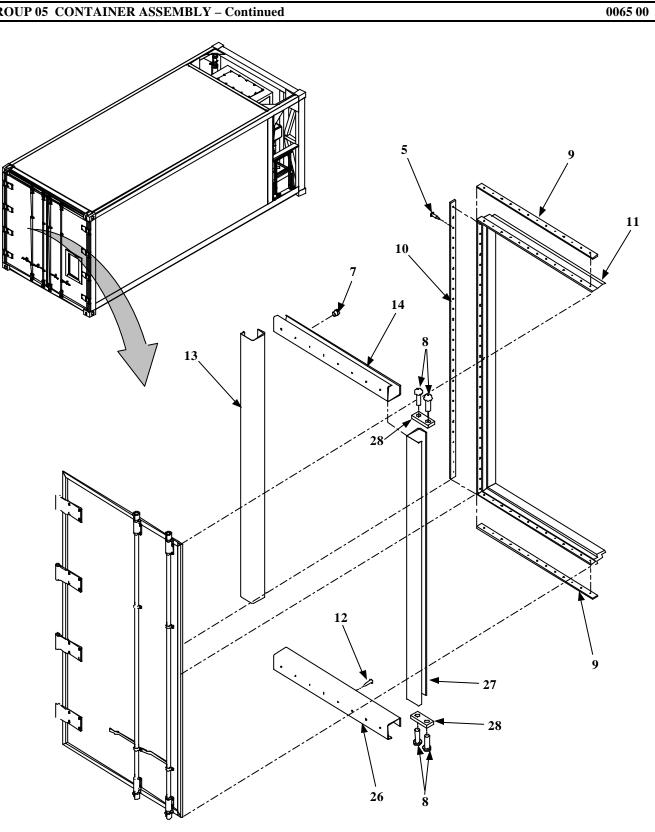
Left Hand Door Assembly (Sheet 2 of 3)
